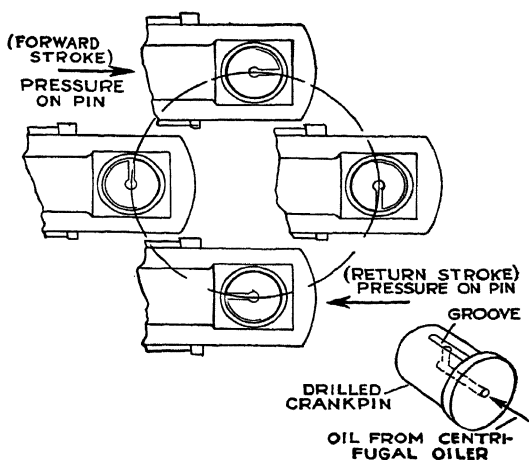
Correct grooving for a crankpin bearing. (Courtesy Socony-Vacuum Oil Co.)
